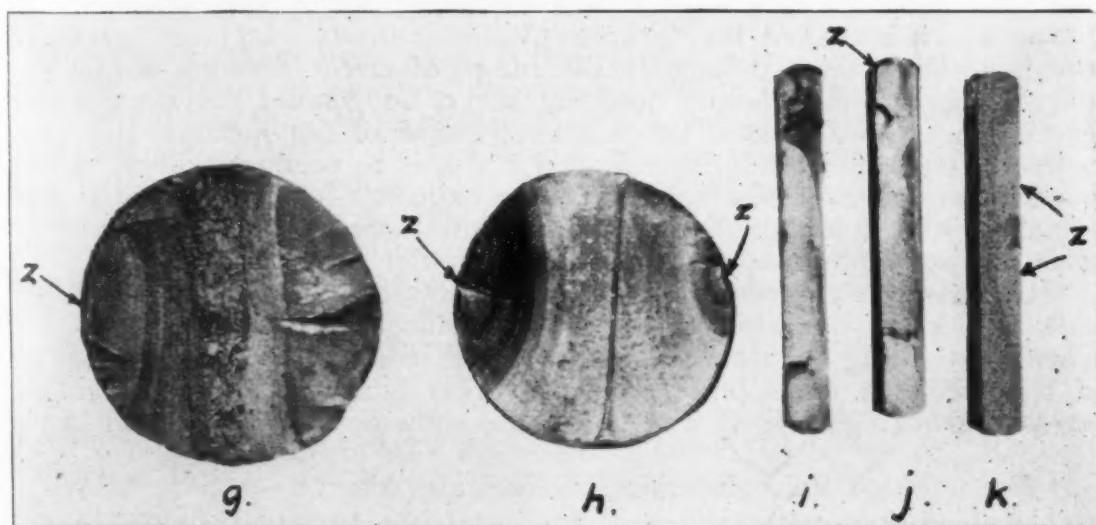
Illustrations of Fatigue Fractures. (g) and (h) Chrome-Nickel Steering Levers Taken from Trucks After Failure in Service. (i) and (j) Chrome-Nickel-Molybdenum Spring Steel After Failure in Laboratory Test for Fatigue Strength. (k) Carbon Spring Steel After Failure in Laboratory Test for Fatigue Strength. Dark Spot in Center of Area of Localization is Due to Brinell Impression Made at That Point
